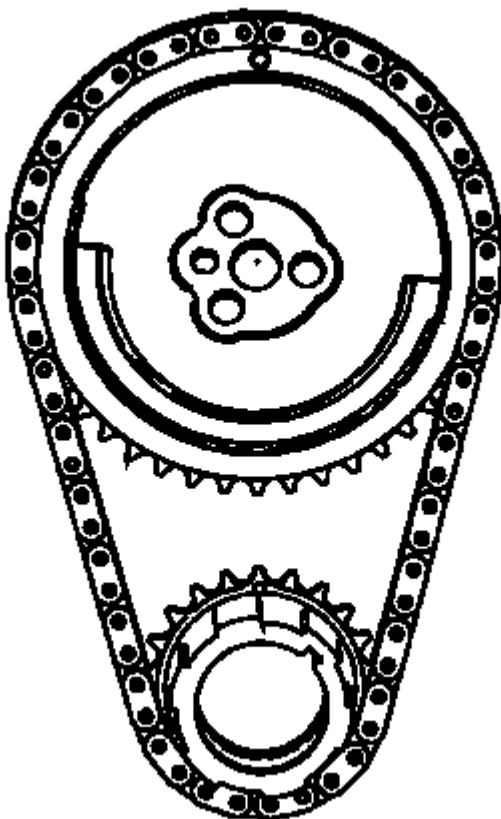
Camshaft And Crankshaft Sprocket Alignment Marks
